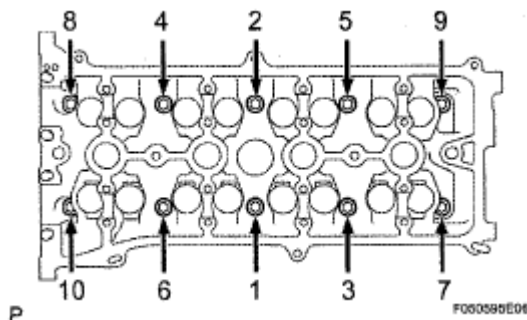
Identifying Cylinder Head Set Bolts Tighten Sequence
